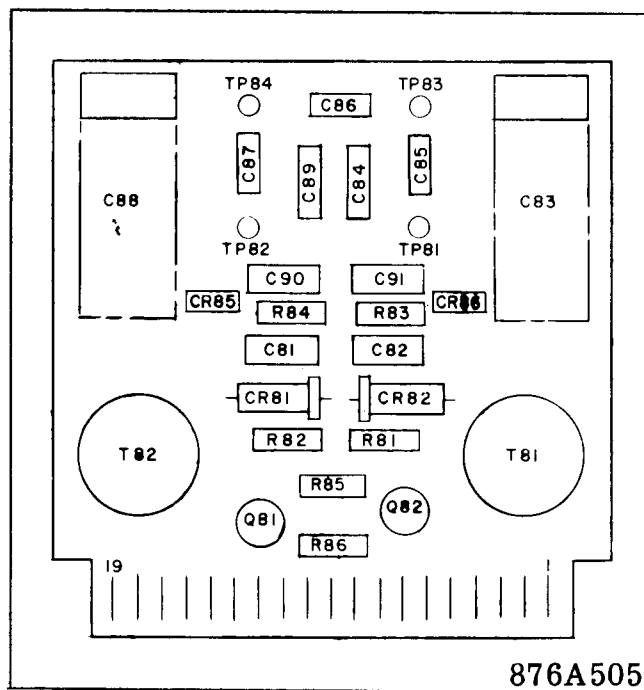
Component Locations on the Discriminator Printed Circuit Board.
